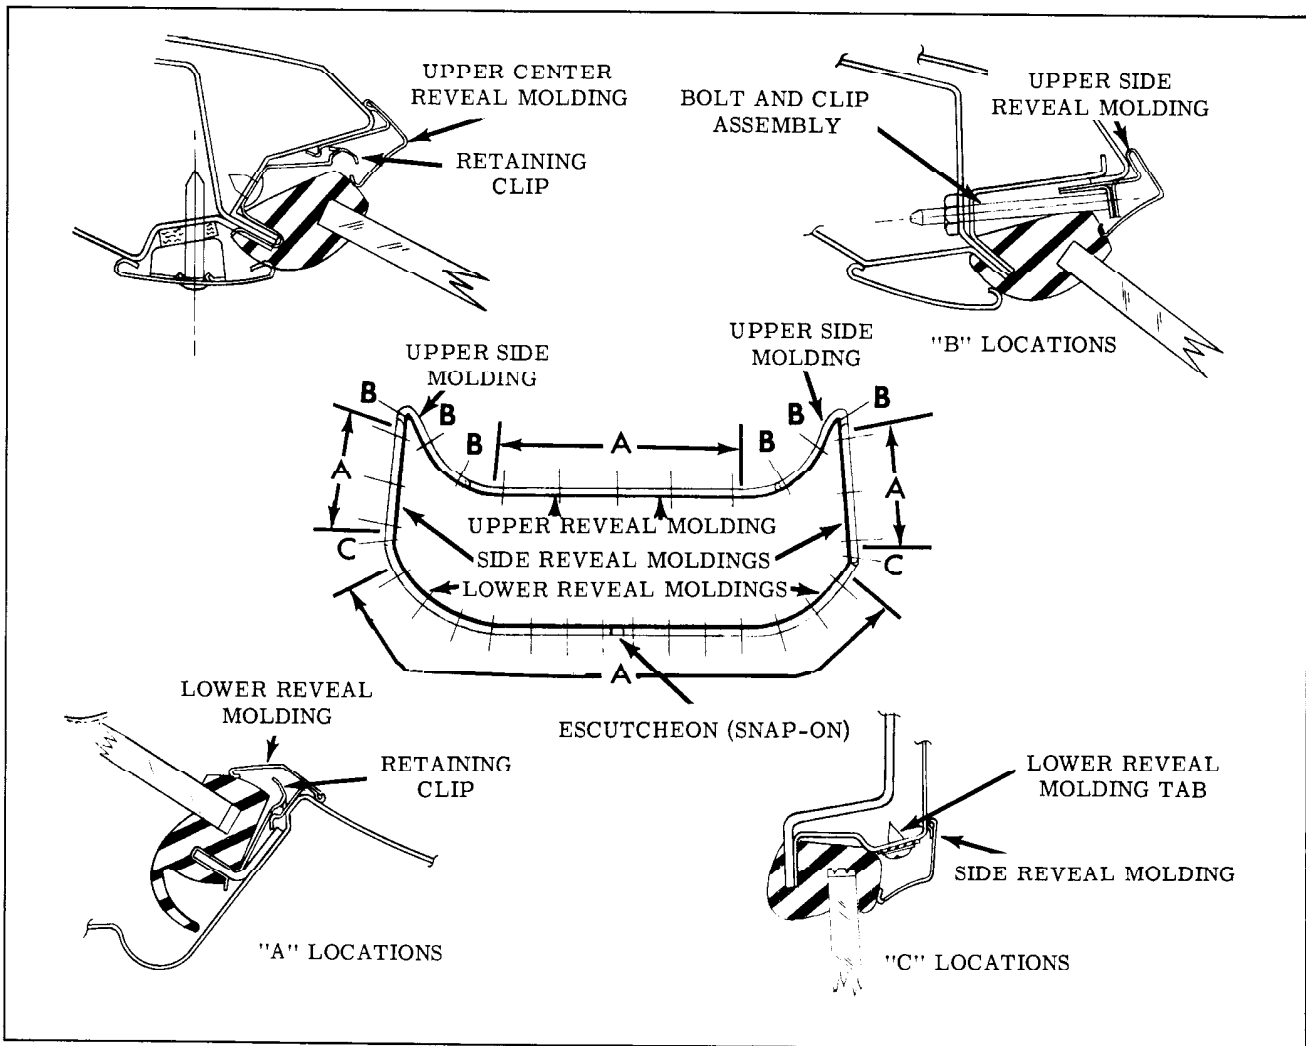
Back Window Reveal Molding (3839 Style)
